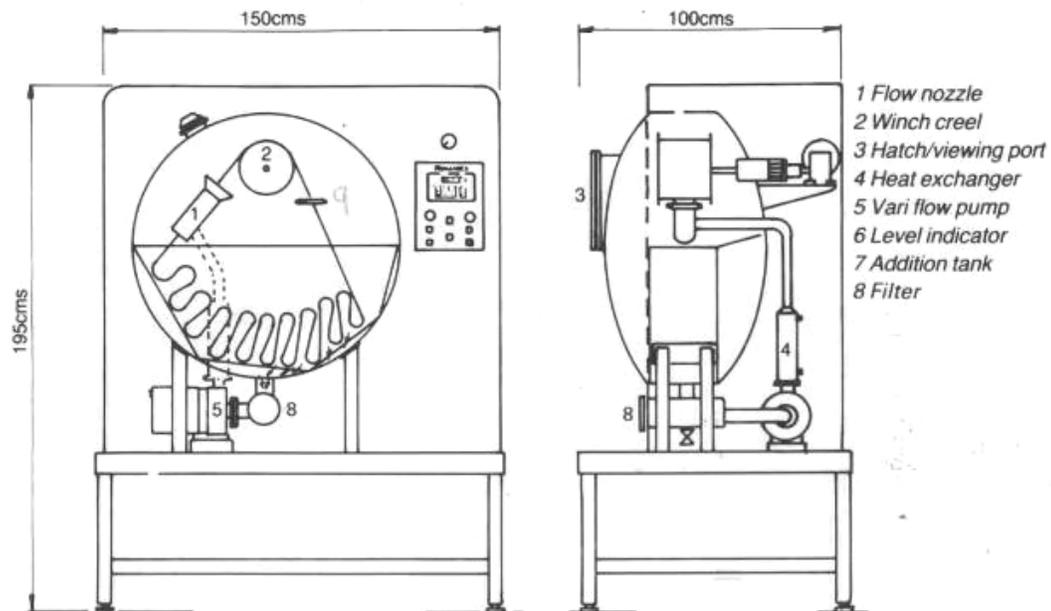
Front and Side Schematic Views of the M10 Jet Dyeing Machine.
